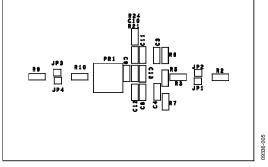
Assembly Drawing, Circuit Side (LFCSP)
